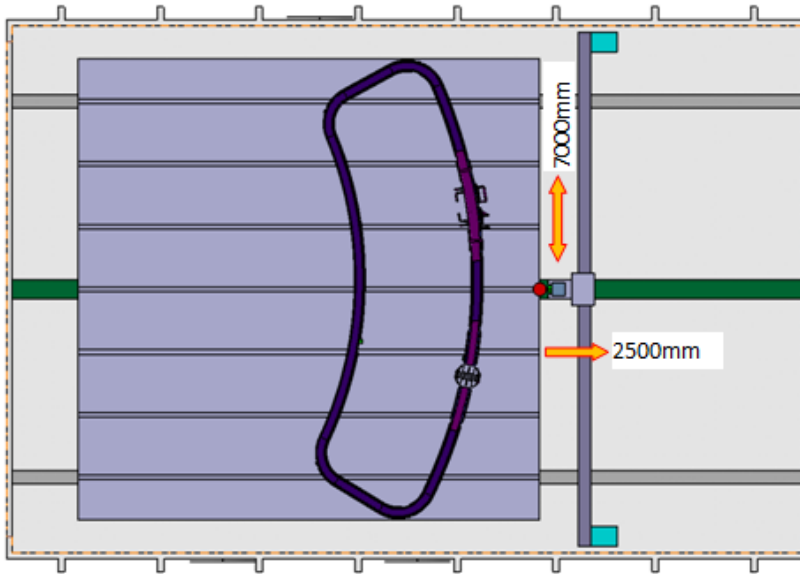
Overview of the BTCC case EBW closure welding
